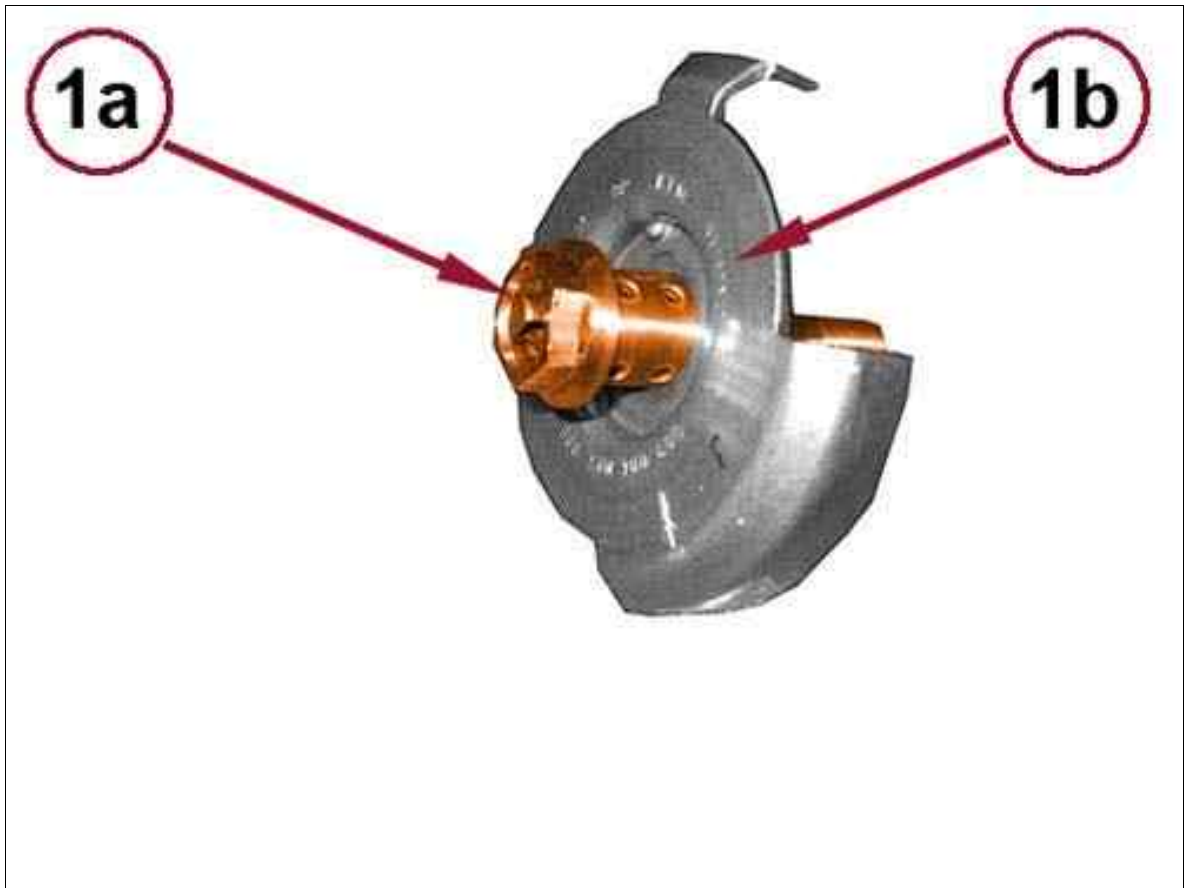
Applying Counter-Torque On Rear Stem Of Camshaft To Remove Bolt Securing Variable Valve Timing System
